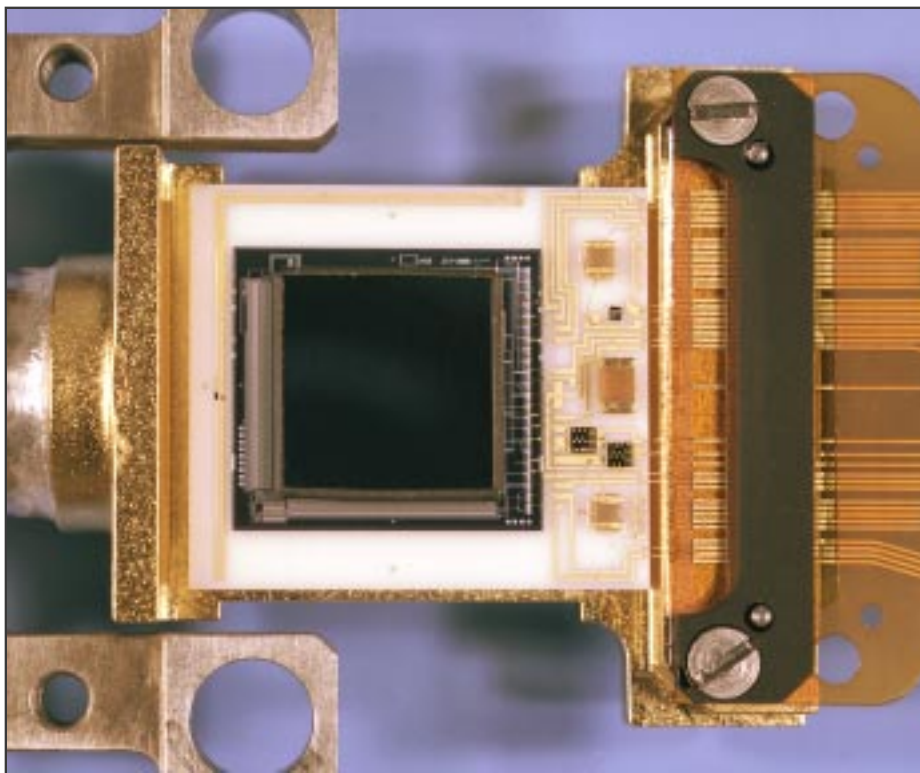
EKV IR1 LWIR FPA / Fanout Assembly.
